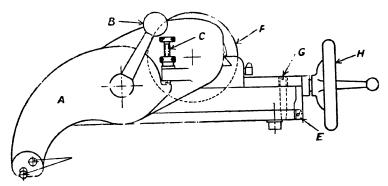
ARRANGEMENT OF WHEEL-TRUING DEVICE ON SCRIVENER MACHINE
